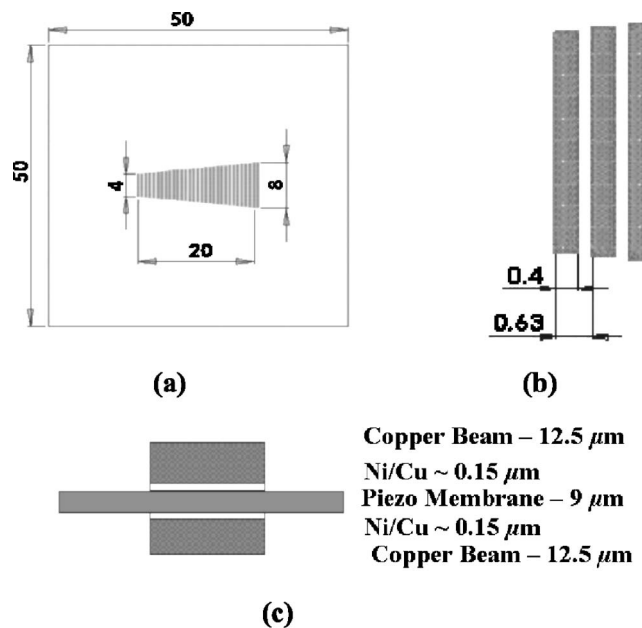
The membrane structure of a 32-beam ABM, not to scale. The dimensions in this figure are in mm unless specified otherwise. (a) The layout schematic. This panel shows how the beams are arrayed on the membrane substrate. (b) Zoom-in view of the beam structure. (c) A schematic of the cross-sectional view of a beam section.
